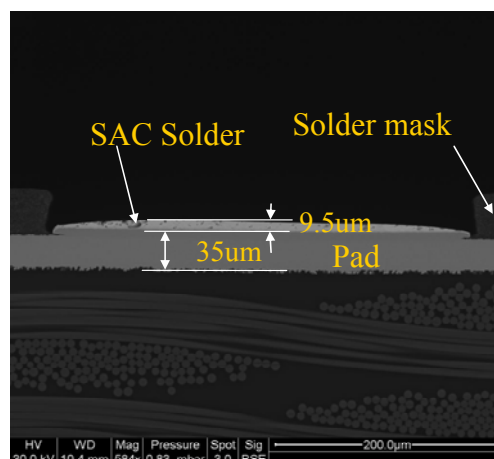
Cross-section of BGA pad area after solder ball removal using solder wick method
